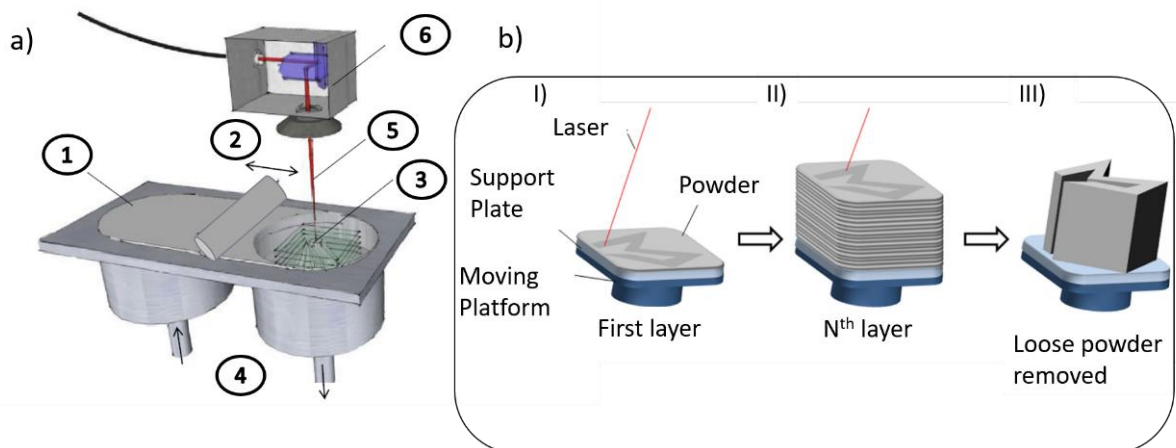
Representative scheme of SLM metal printing machine adapted from [163,164].
